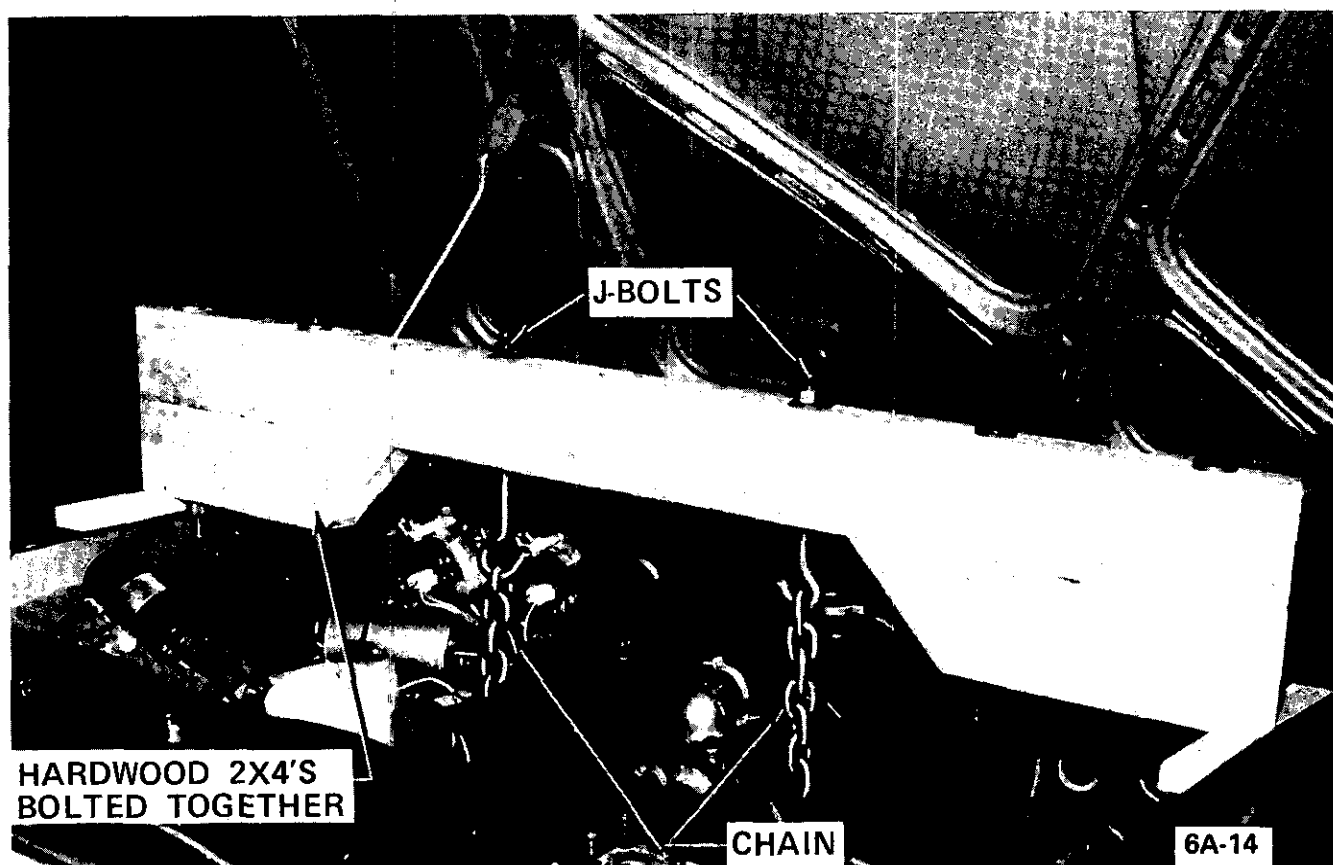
A-14 Engine Support Tool • Opel 1900 and Manta.
